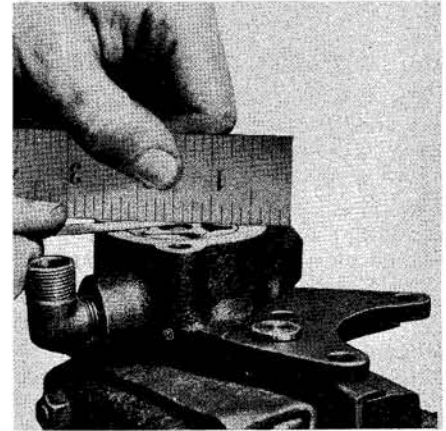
Check clearance between rotors with a feeler gage as shown. Clearance should not exceed 0.006.
